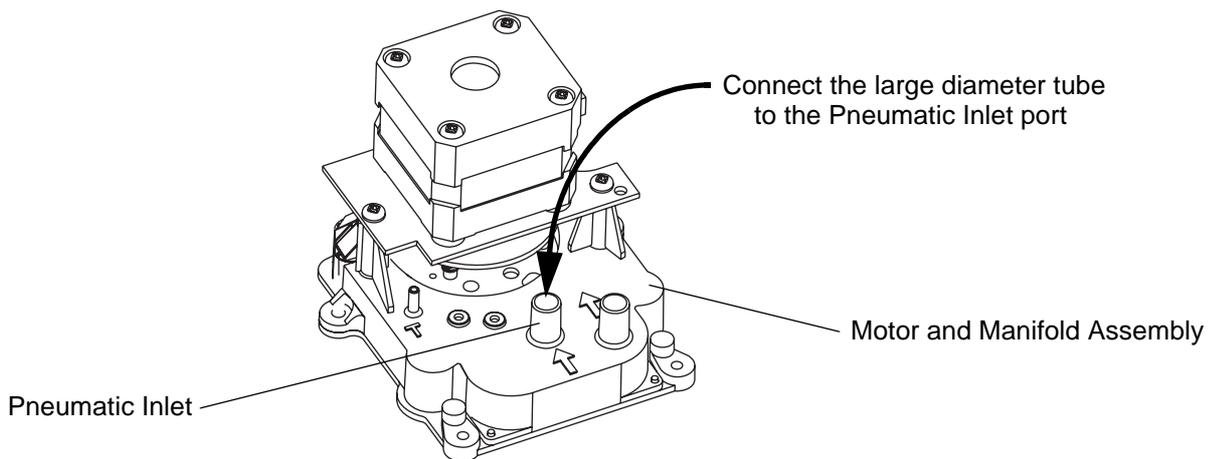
Pneumatic Inlet on the Motor and Manifold Assembly
